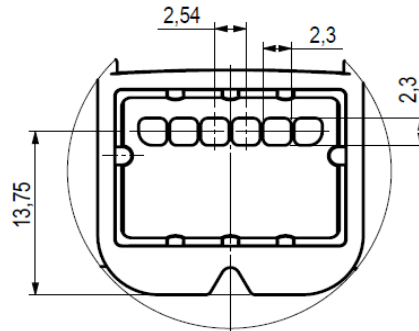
Top view of the sensor's connector interface with dimensions in mm
